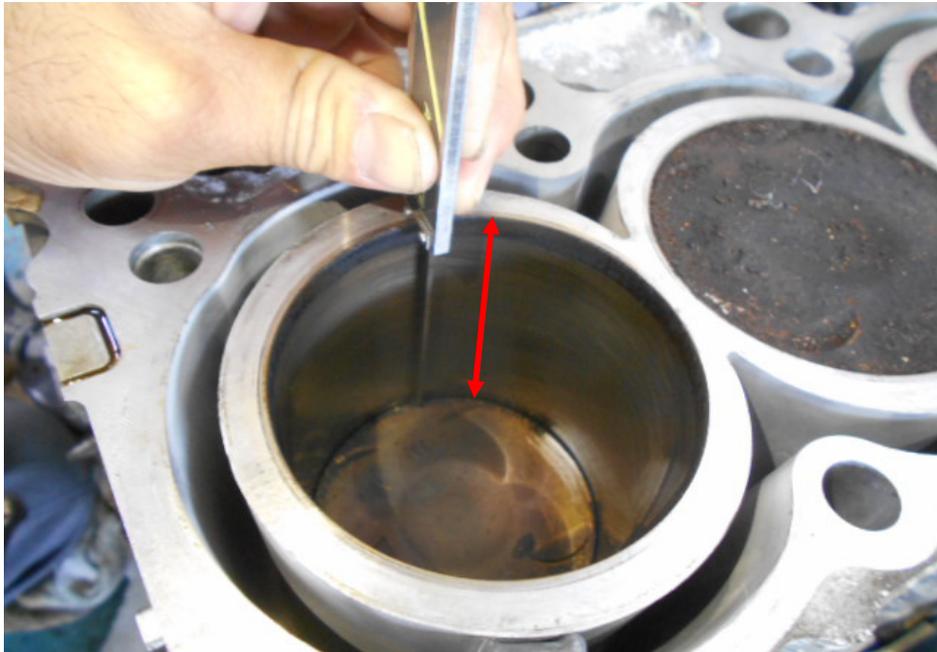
shows the bottom block of the Honda engine and the digital Vernier Caliper (arrowed) that was used to measure the bore and stroke measurements of each cylinder, which typically can be used to determine the engine displacement or more commonly referred to as engine cc. The digital Vernier Caliper was calibrated before the start of the measurements.
